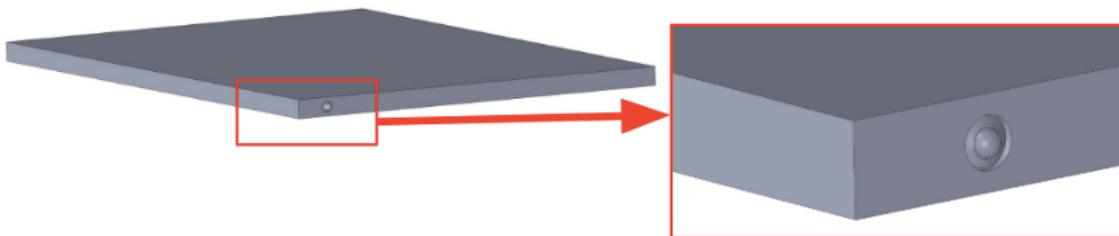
3D CAD close-up of shelf with spring-loaded ball pins.
